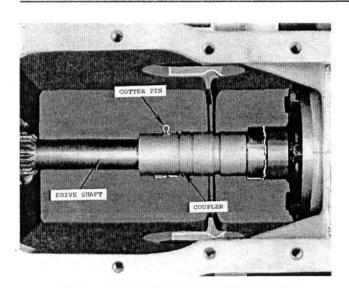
DRIVE SHAFT COUPLER POSITION
